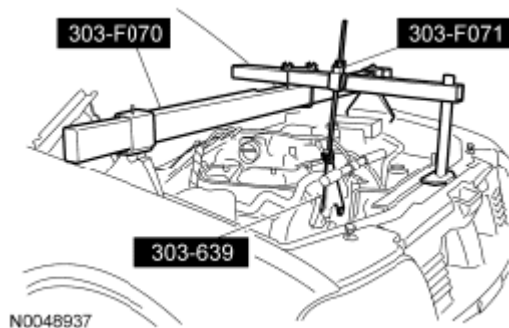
Installing Engine Support Bar, Support Hook And Engine Support Bracket
